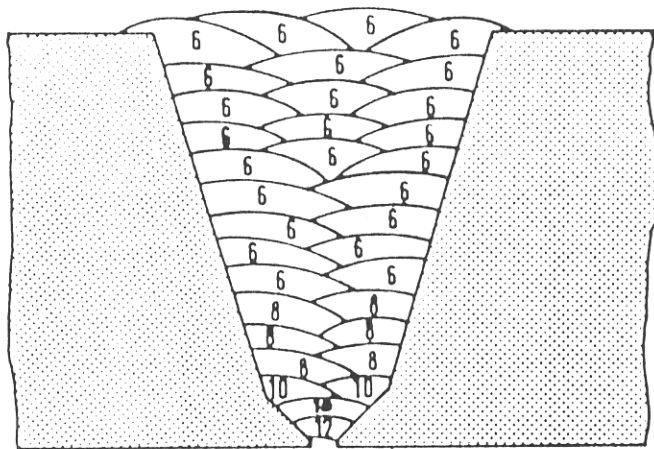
Often, the weld beads in a multipass weld are deposited in layers. After Middleton & Cane [9].
